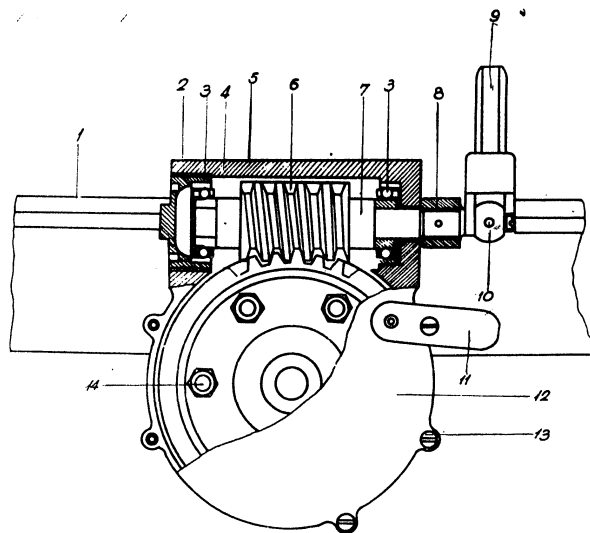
BARREL ELEVATING MECHANISM ASSEMBLY
